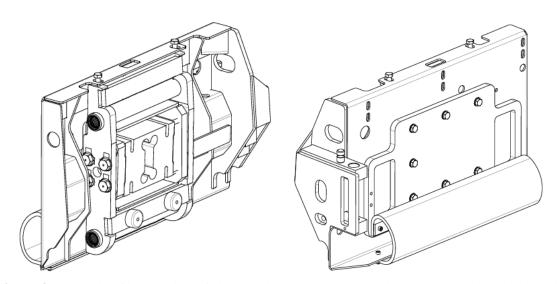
Example of installation of single point load cell mounted on a rear loader or side loader
